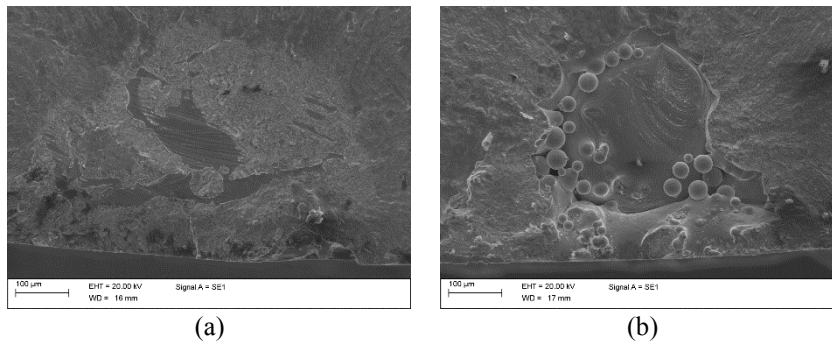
Types of defects at the origin of the fatigue failures: (a) defect due to insufficient bonding between successive layers; (b) defect due to incomplete fusion.
